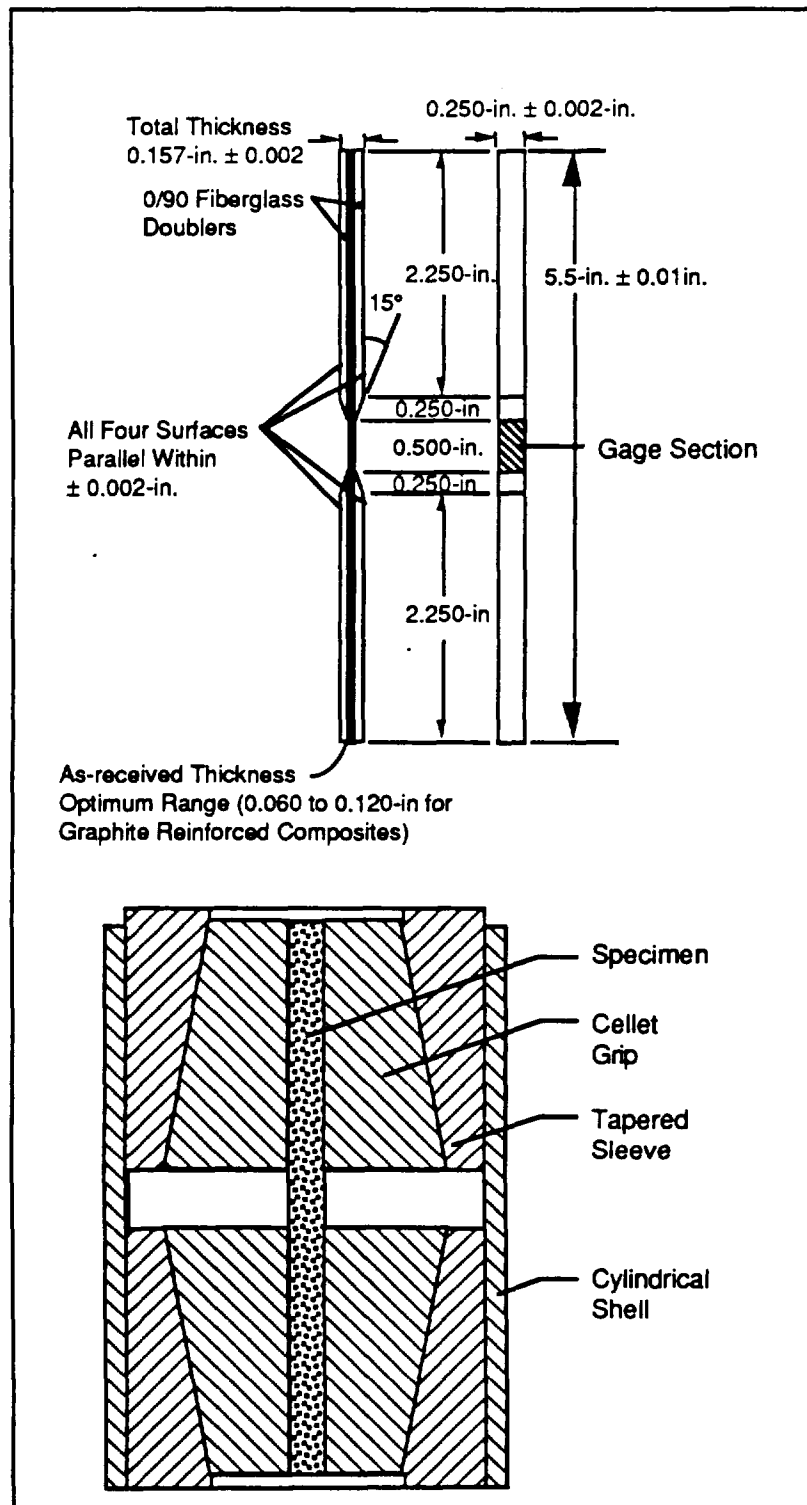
Compression Test Specimen and Fixture (ASTM D-3410) for Composites
